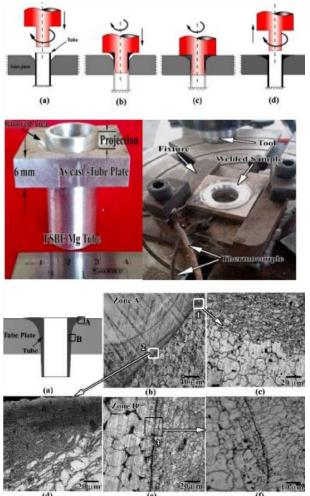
Tube to plate welding (by Friction Stir Welding)
